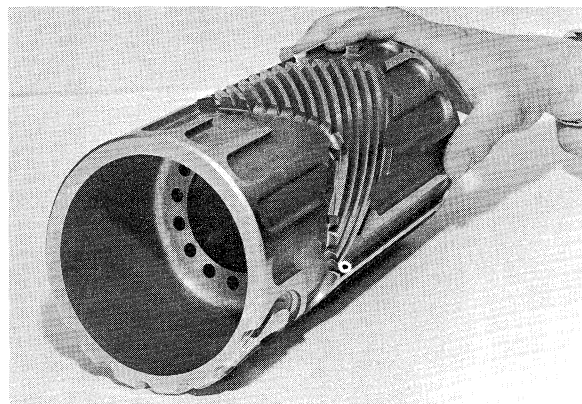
A cam nut whose gear segment teeth are ground.
